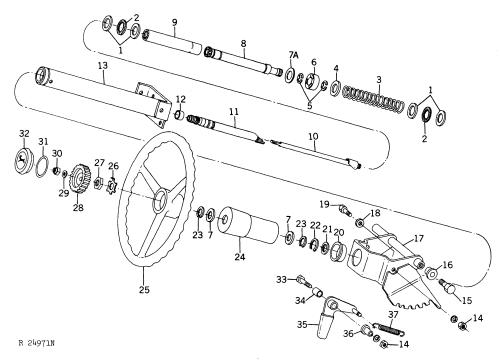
Cut-Away of Steering Shaft Assembly (See Fig. 13, Legend)
